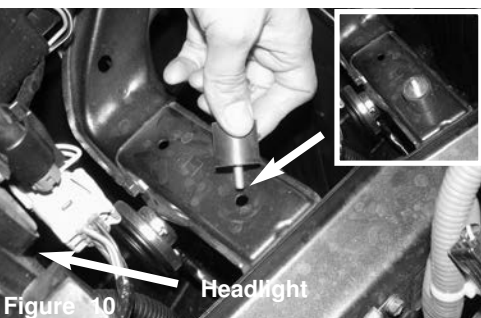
Locate the hole on the chassis support bracket behind the passenger side headlight. Mount the supplied vibramount to this hole and place a M6 nut from underneath and secure the vibramount to the bracket
